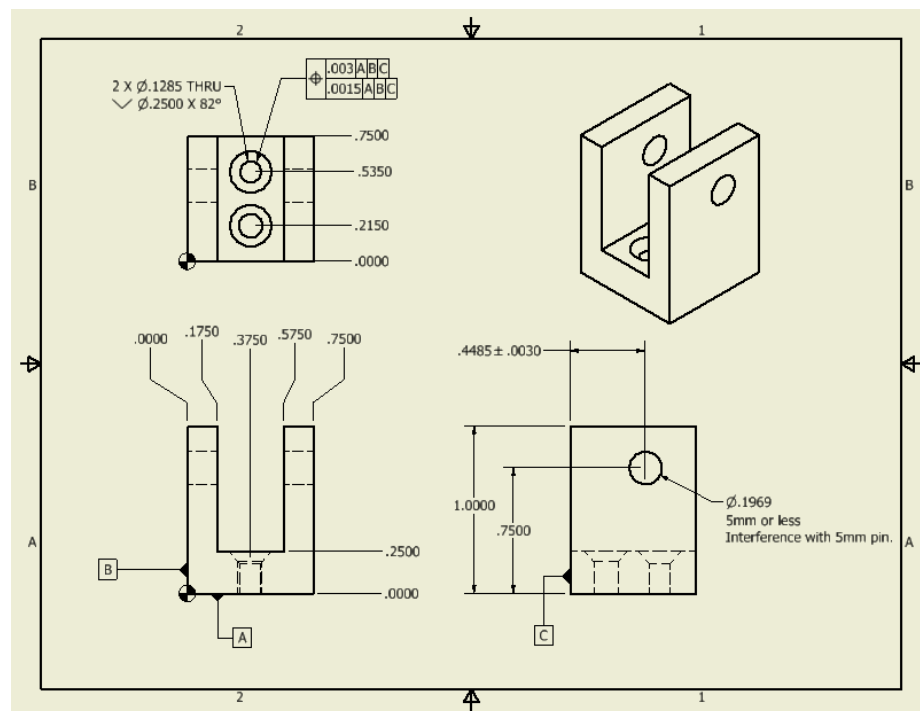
Dimensional drawing of bearing wheel holder for projectile
